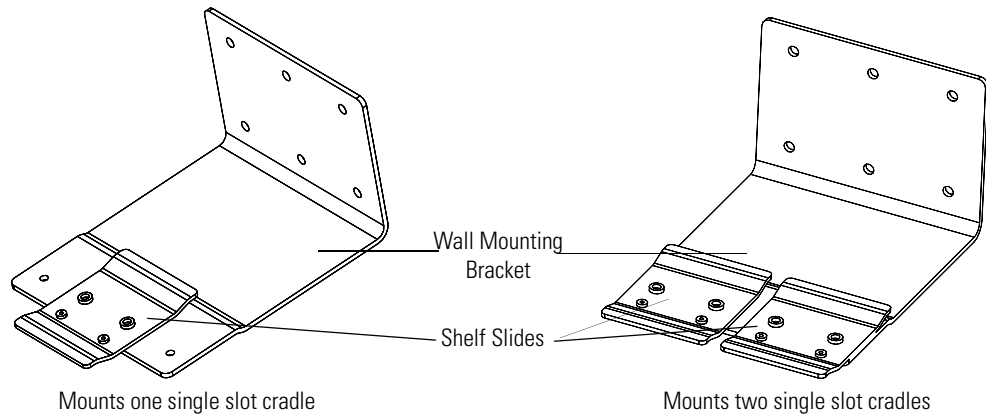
Wall Mounting Bracket with Shelf Slide
